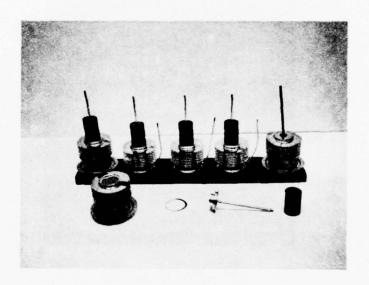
End Cap Brazing Fixture: End caps are brazed into the heat-pipes as shown. The weight is necessary to insure proper seating of the end cap.
